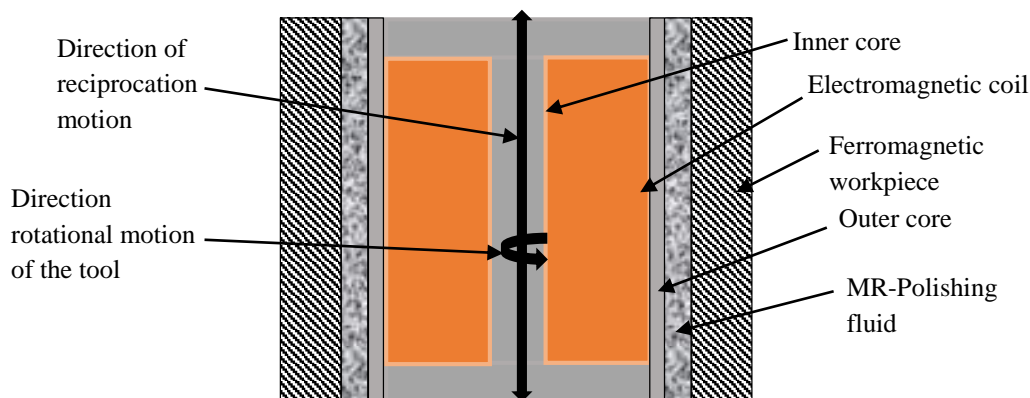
I-shaped magnetorheological (MR) honing tool
